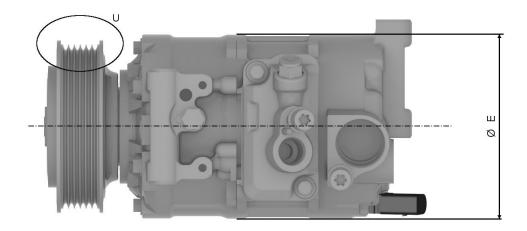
Dimensions of refrigerant compressor, top view (example DENSO-7SEU17)
